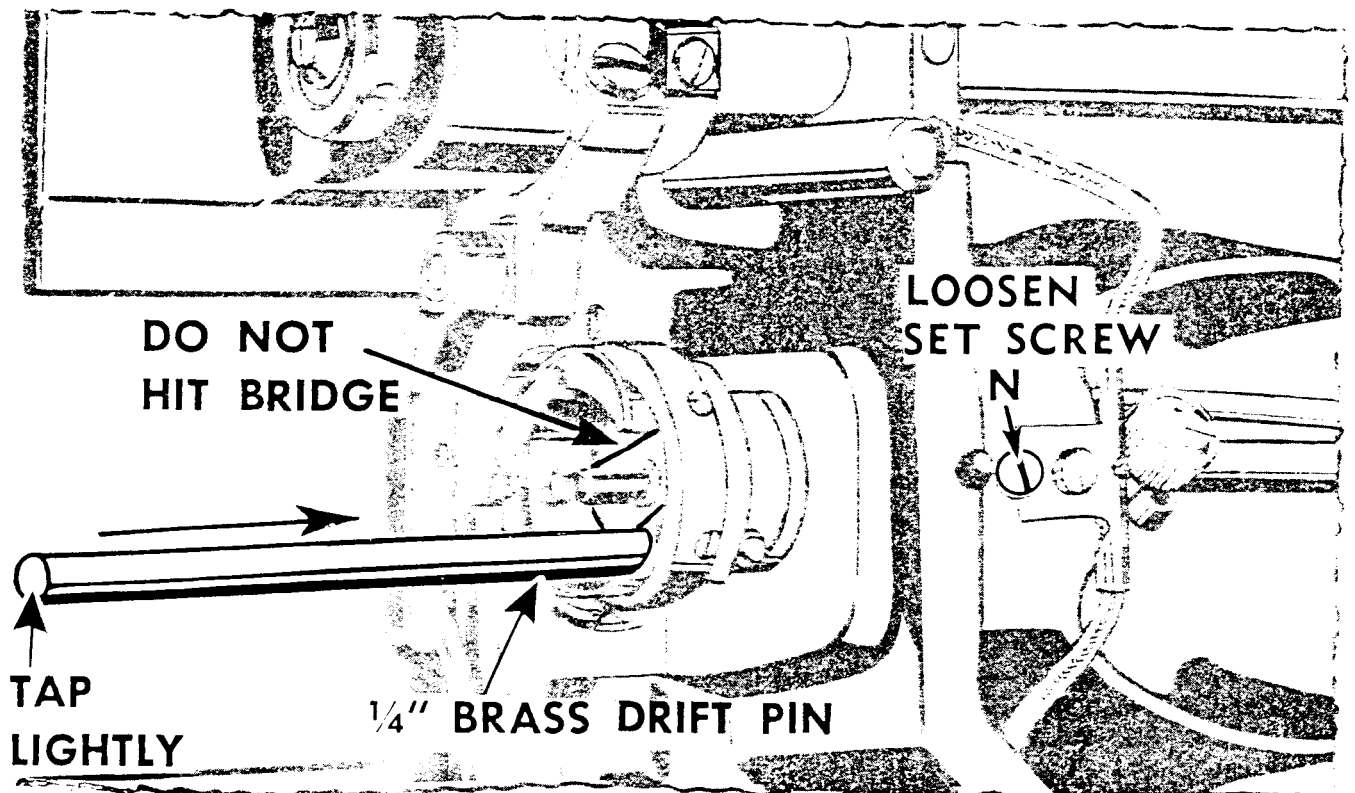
Moving Sewing Hook Assembly Away from the Needle
